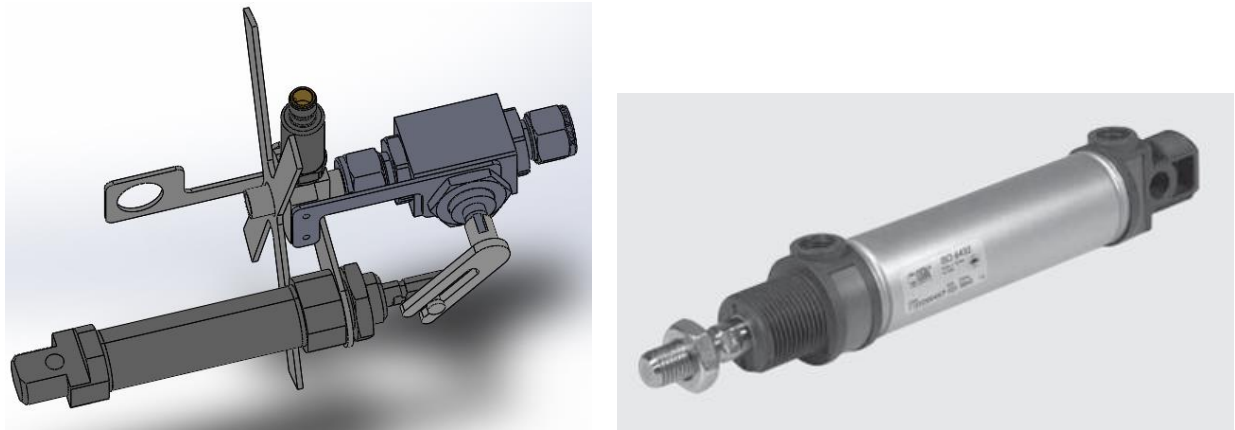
Manual ball valve Ham-Let H6800 (left) with cylinder actuator (right).
